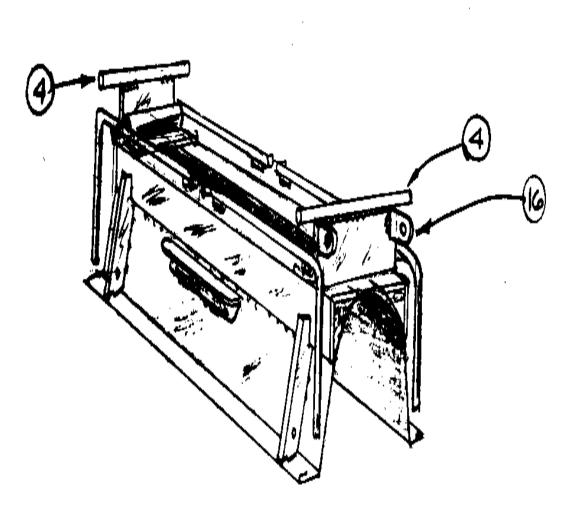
WELD ON HINGE PIECES (16) ON BOTH ENDS
